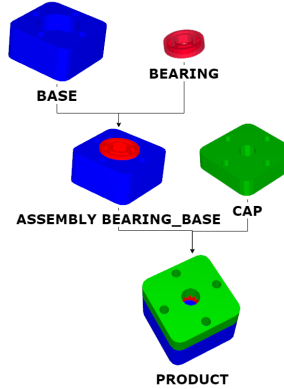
Product (Turning Mechanism) and assembly steps.
